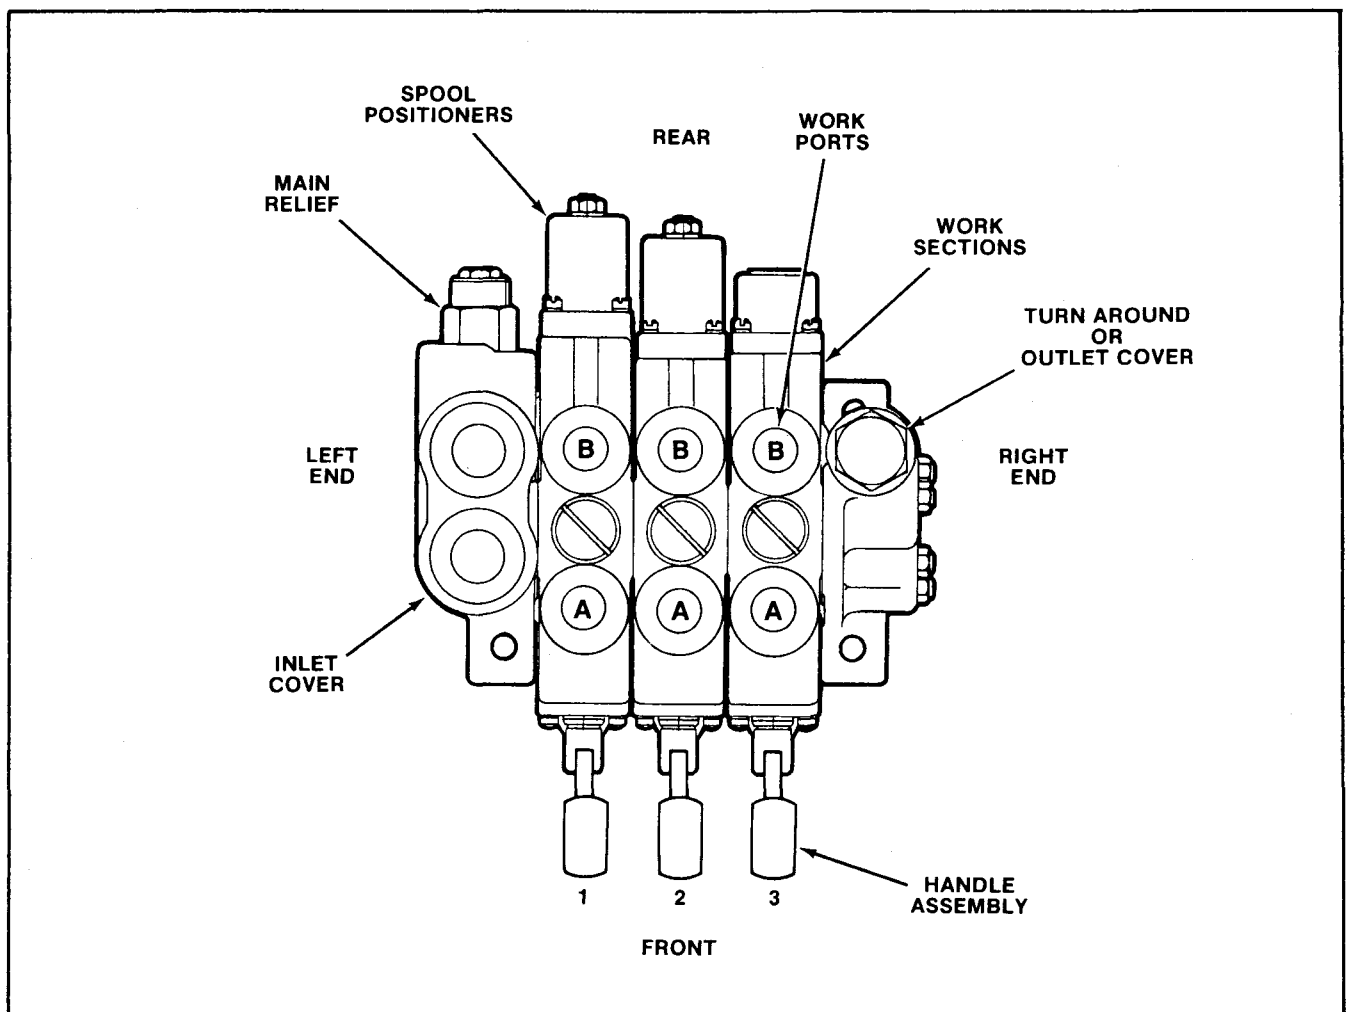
Schematic View of a Typical Model V42 Control Valve Assembly.
